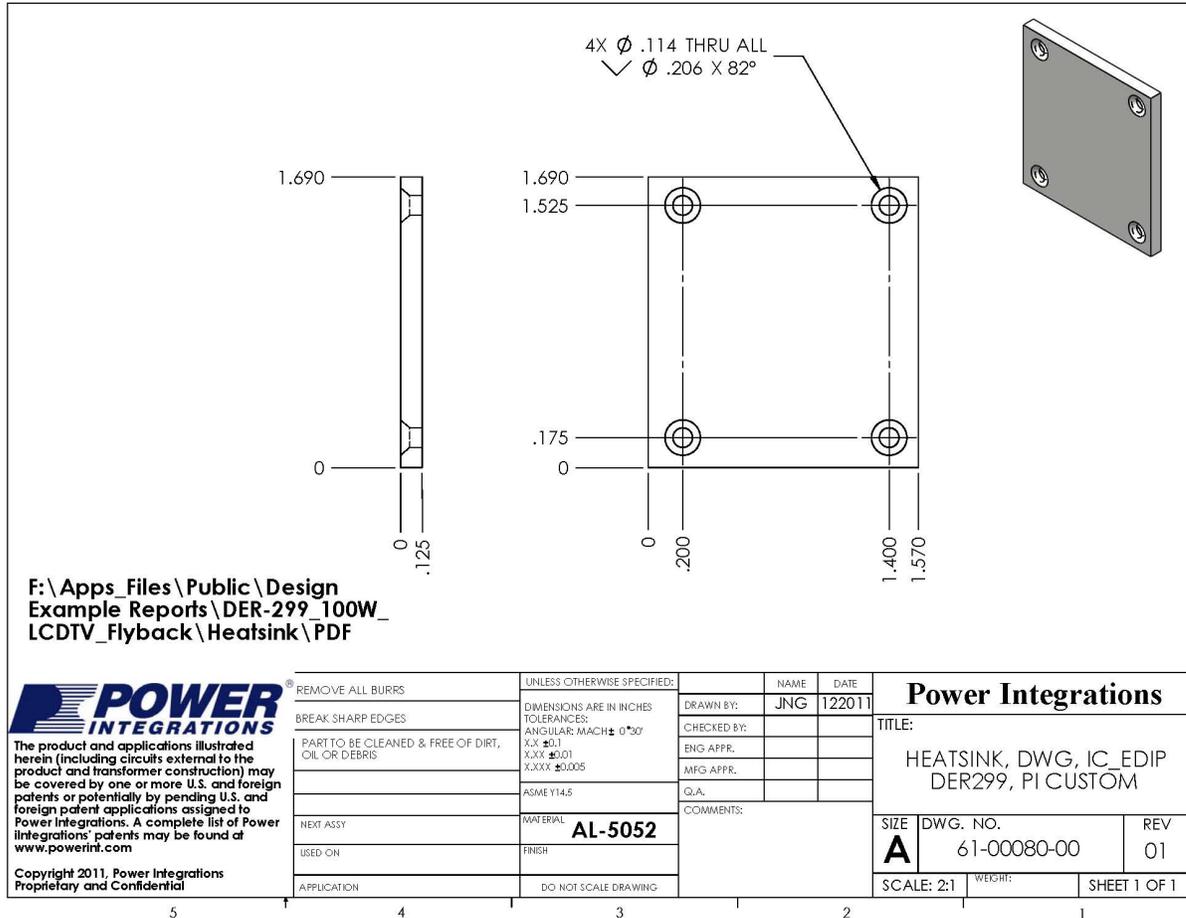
Heat Sink Fabrication Drawing for TOPSwitch-JX.
